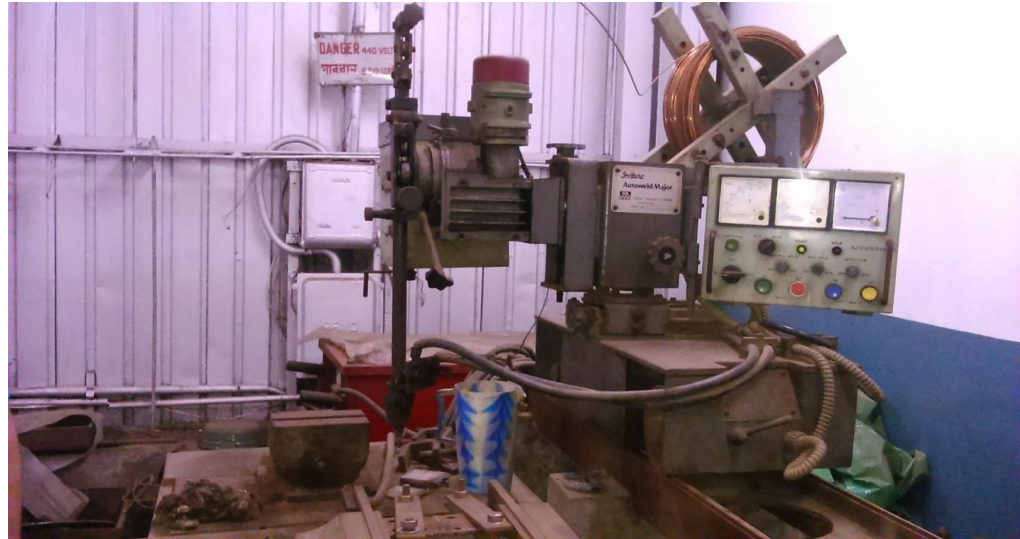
Photographic view of the submerged arc welding machine
